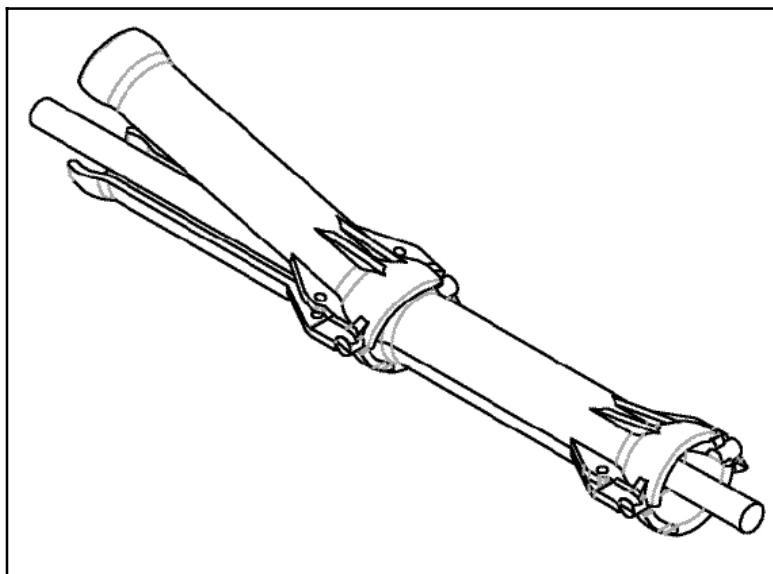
Articulated Piping to Protect the Submarine Cable
